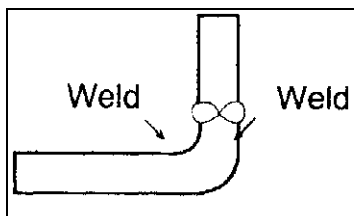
Side wall in lieu of corner weld — best inside, good outside, fatigue resistant
